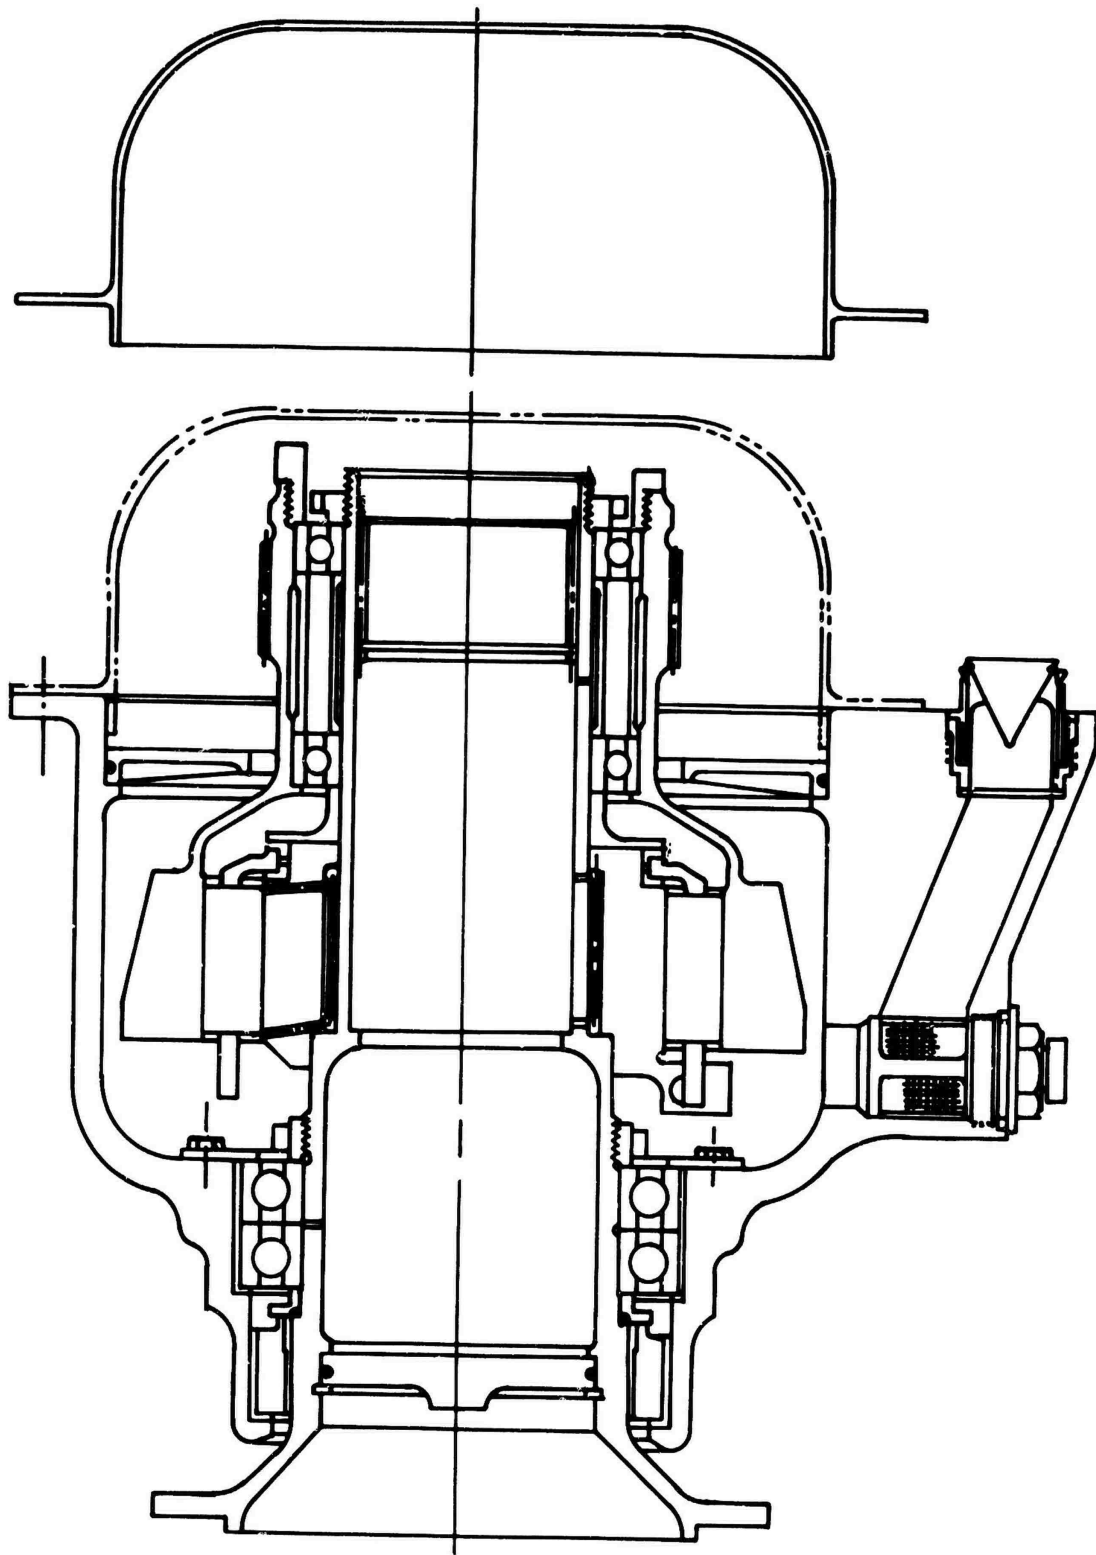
Typical Protective Cover Shown on Freewheel Unit Module.
